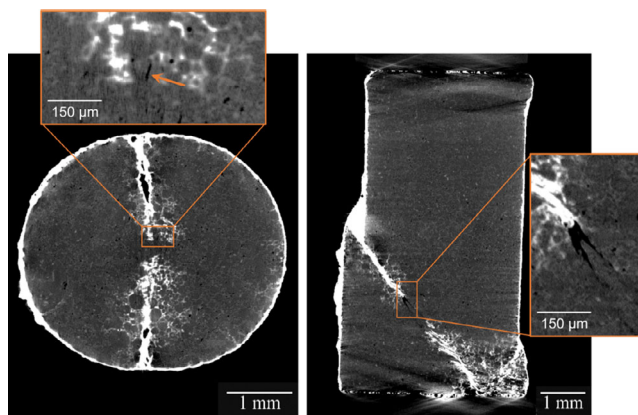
Horizontal and vertical CT-image sections of sample SC-A-1-500 healed by soldering. Due to the high X-ray absorption of the solder, the sample and the cracks are given in dark grey and black. The solder is represented by the bright phase. Open crack tips, not filled by the solder, can be observed in the magnified areas framed orange.
